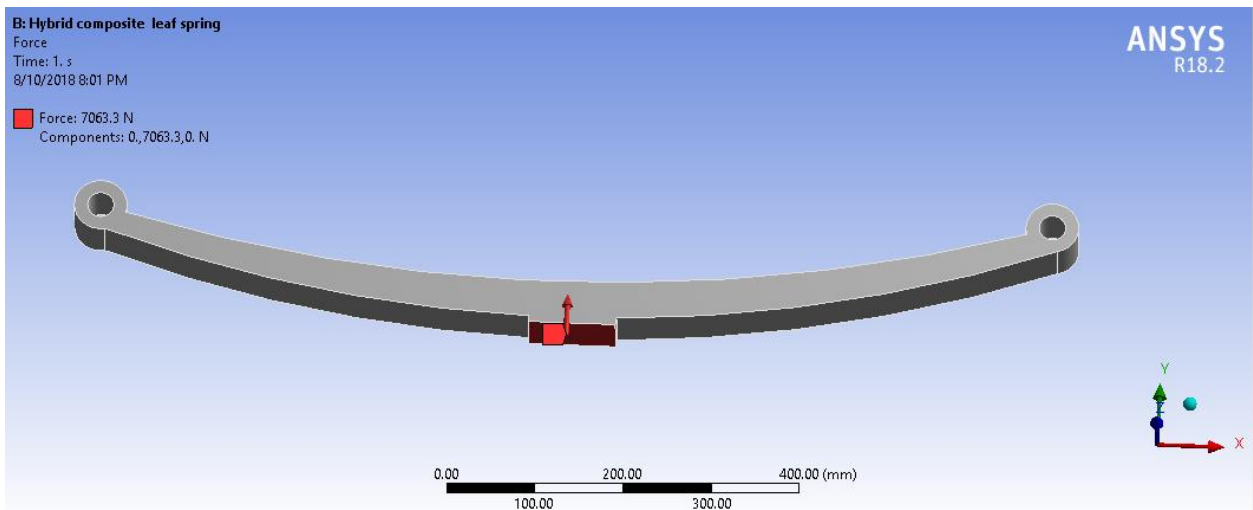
Applied load on the center of the hybrid composite leaf spring
